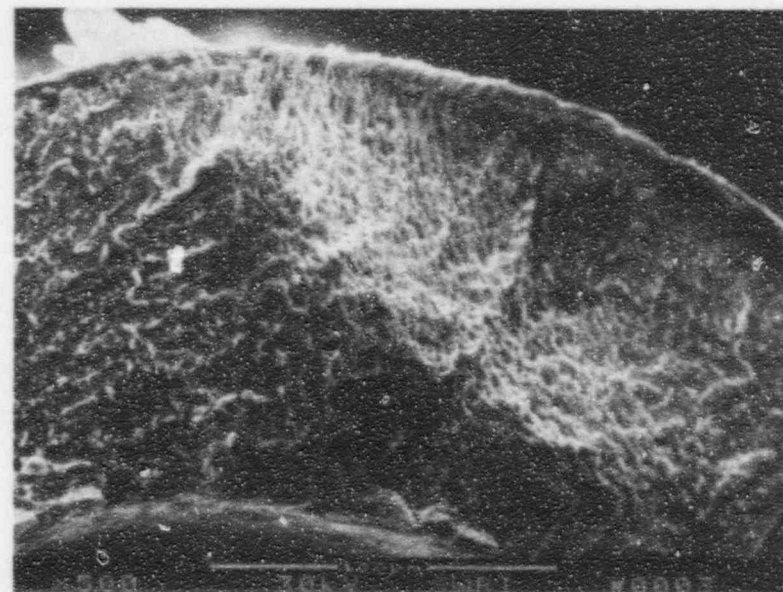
SEM Fractographs of SwRI Wire No. 426-1 Showing Slant Fracture.
